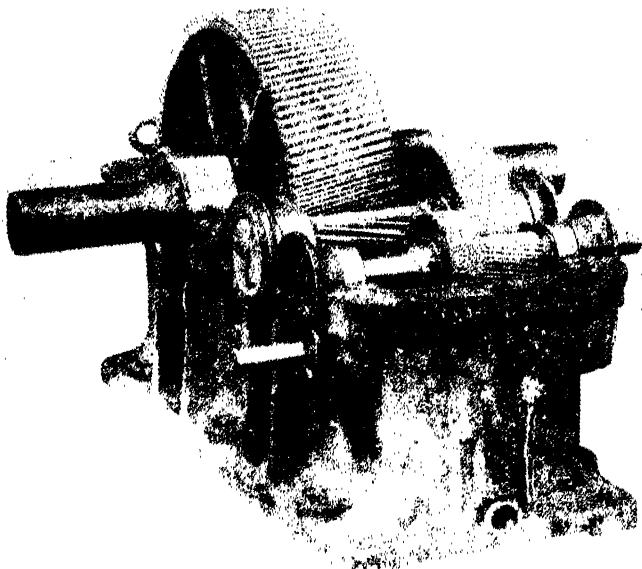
Helical Gear Reducer. *Courtesy Foote Bros. Gear and Machine Co.
